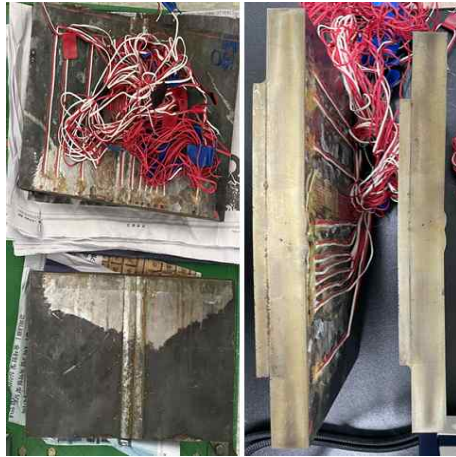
WEDM cutting process of constrained weld specimen
